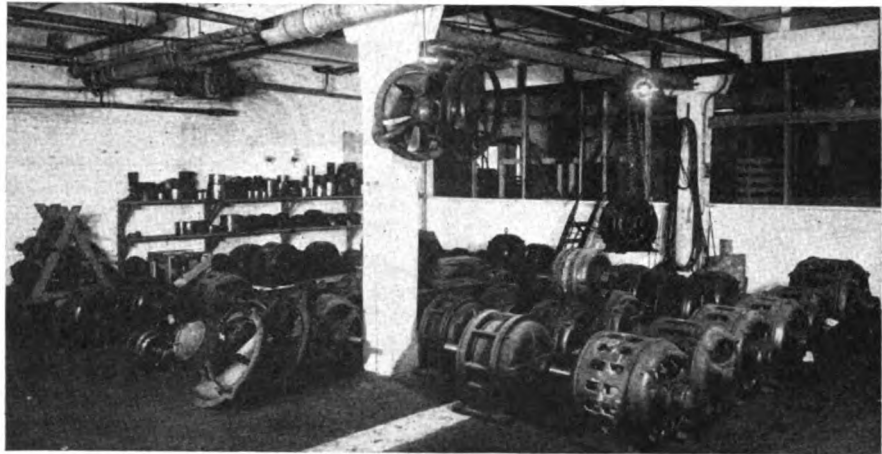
Storage space for surplus equipment, spare motors and pulleys. Equipment marked X is for sale or disposal. Motors carrying a tag are spare motors for a particular installation. Other motors without tags are spares available for use wherever a motor of that size will fit. Motors are handled in and out of the room by a chain hoist on a monorail trolley.
